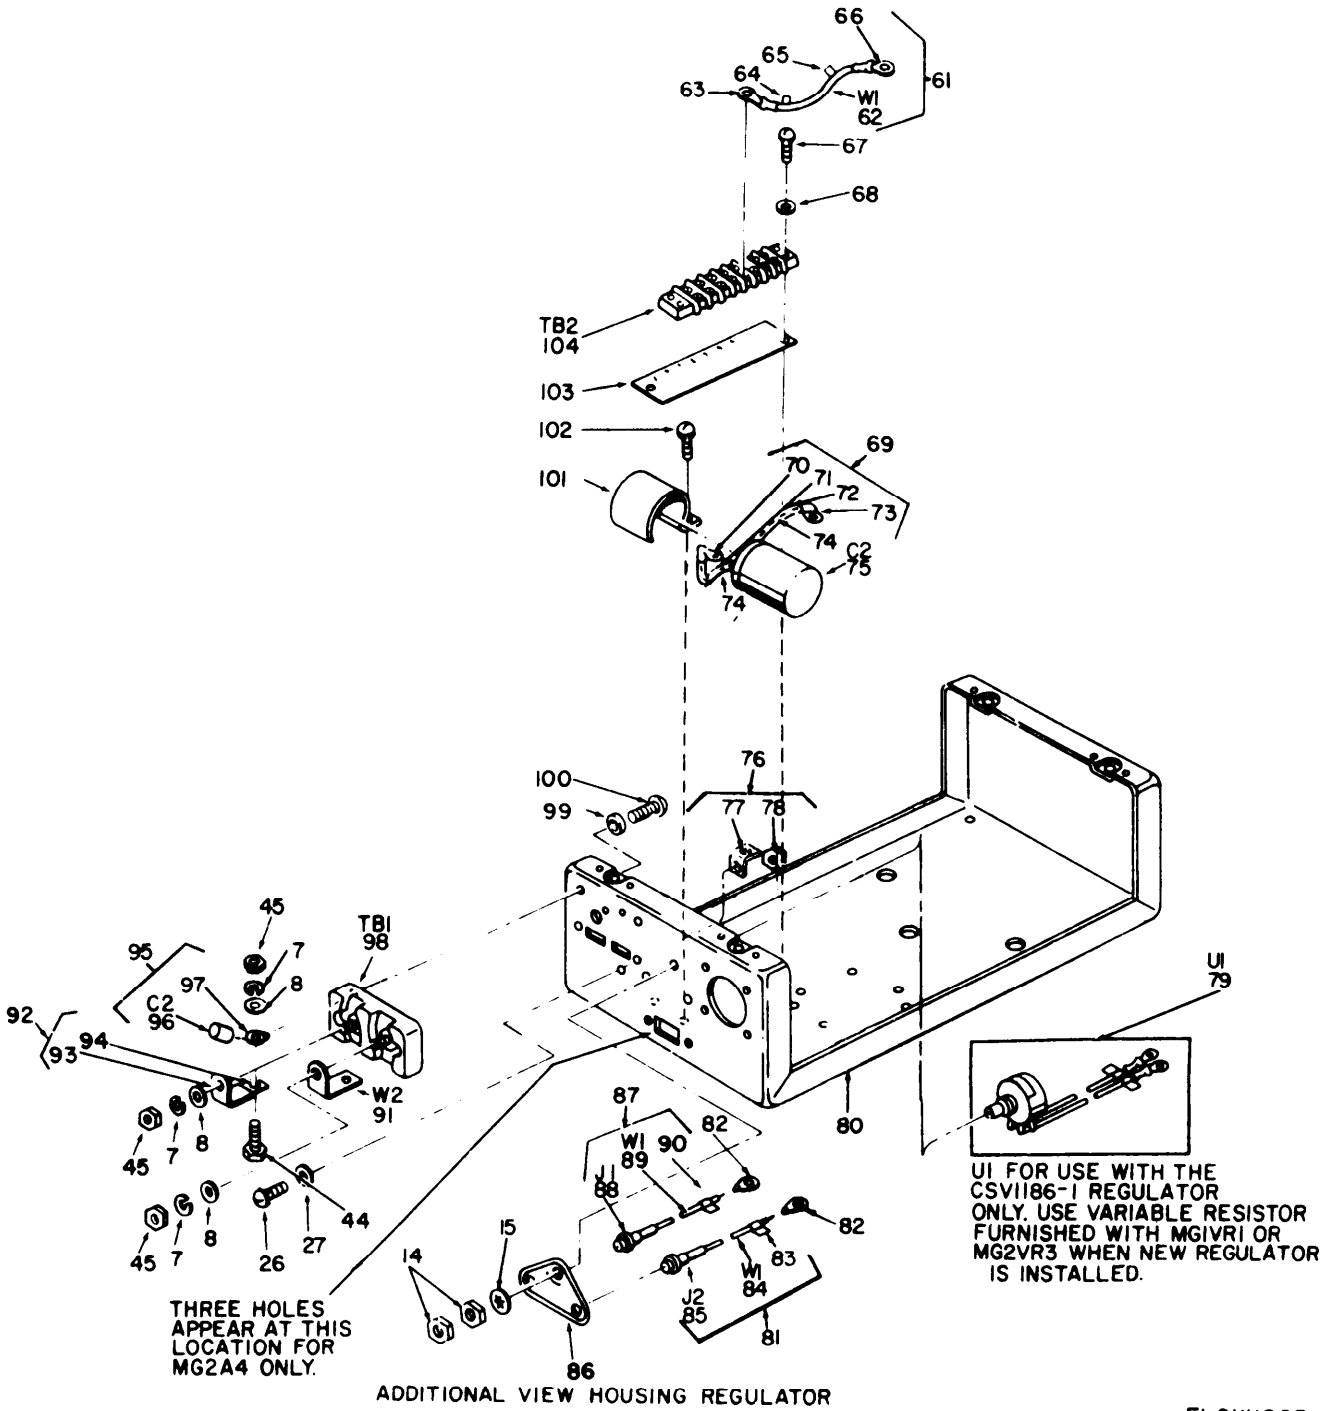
Regulator Section (CSV1186-1, CSV2215-2, CSV2215-3), Regulator Housing Assembly (Sheet 2 of 2)
